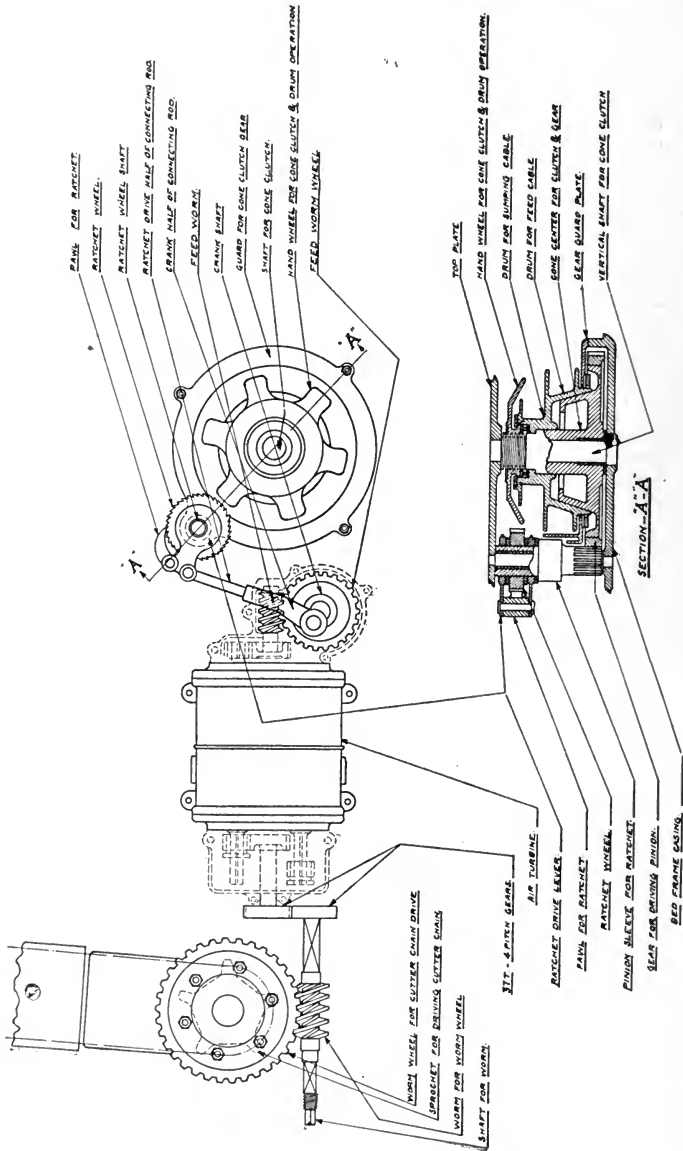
Arrangement of Parts of Jeffrey Air-turbine Chain Coal-cutter.
